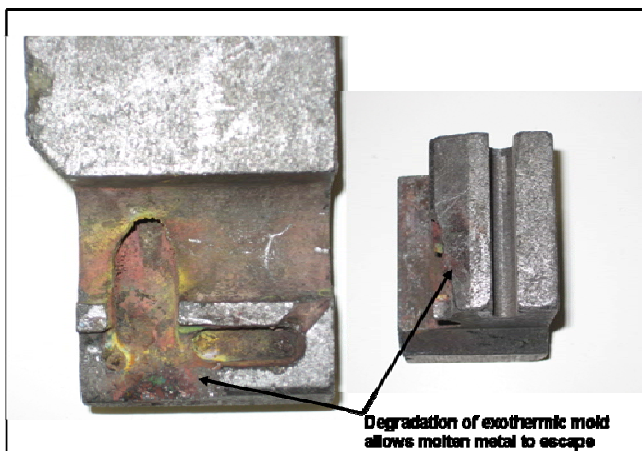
Typical Degradation of an Exothermic Weld Mold
